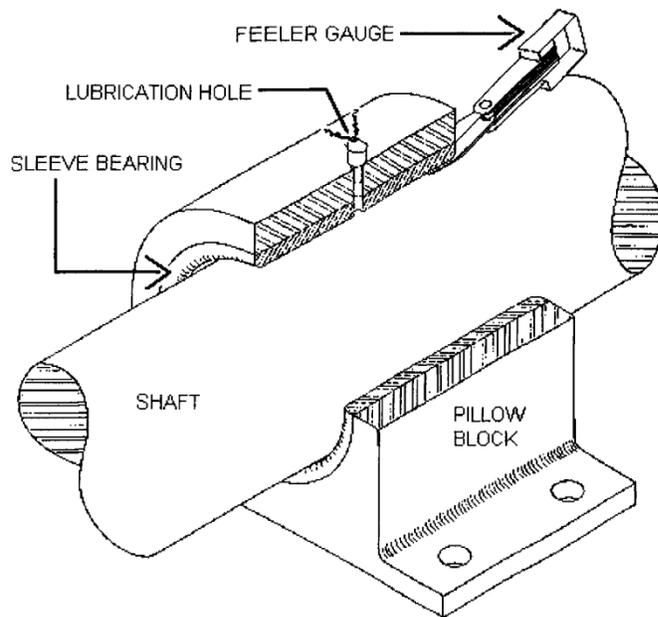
A sleeve bearing pillow block supporting a transverse shaft
